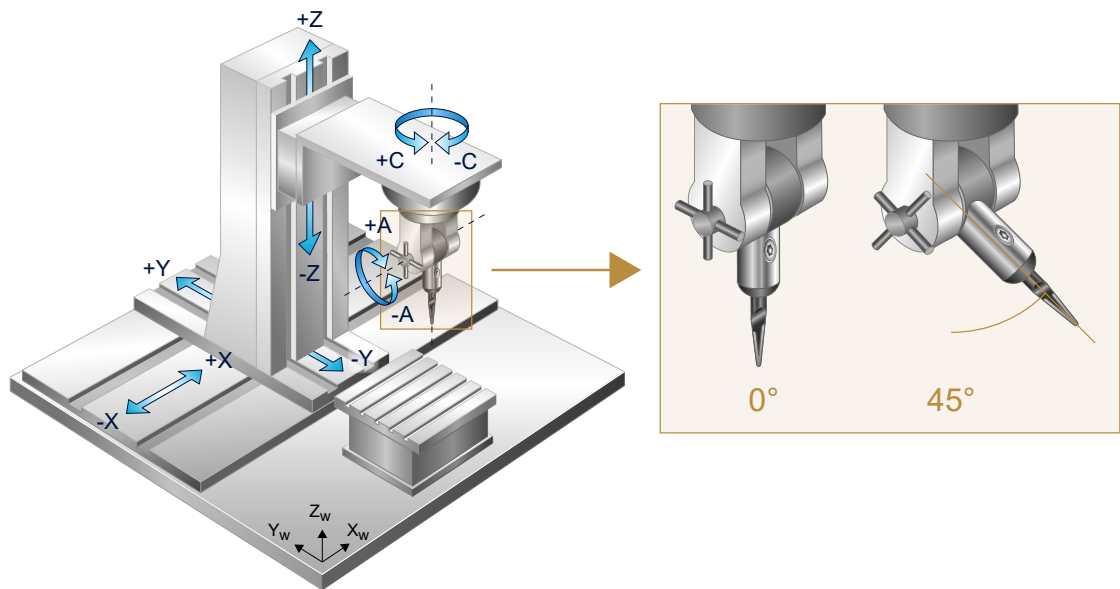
5-axis kinematic (metal cutting tool with manual auxiliary axis A)
